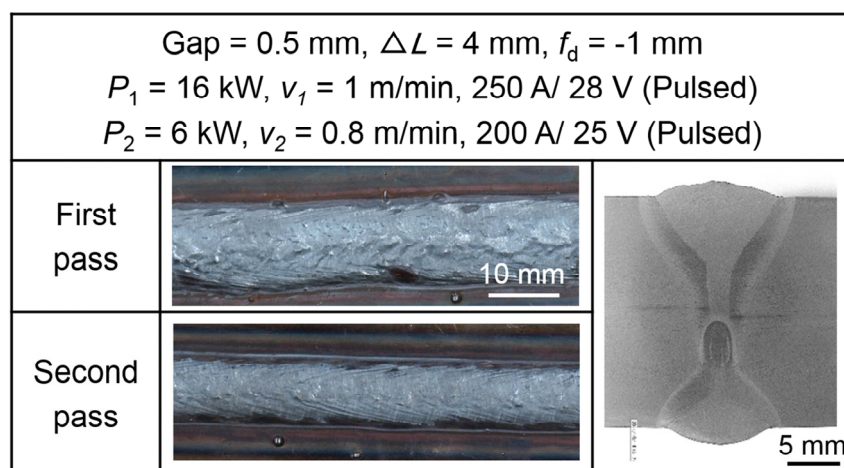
Surface appearances and cross section of weld bead produced by two-sided laser-MAG arc hybrid welding.
